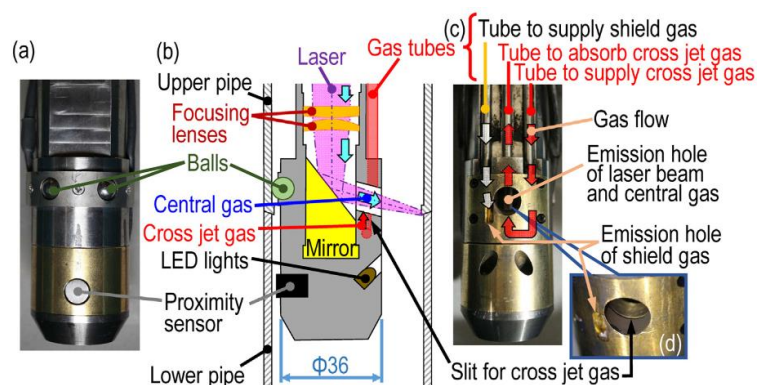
The original design of the laser welding bore tool head and its gas line system for JT-60 SA [106]
